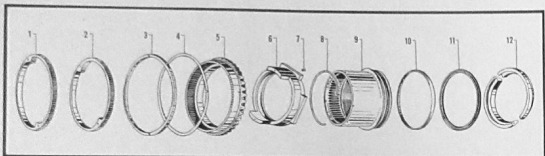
Extended View of Retaining Nut, Connecting Gear, and Stops Group
